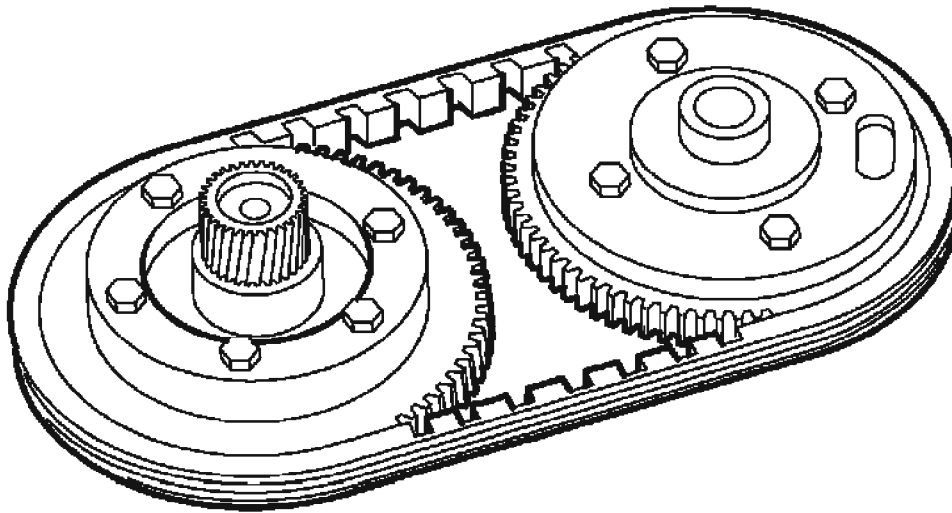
Removing No 10 Driven Sprocket Thrust Washer From Reverse/Overdrive Ring Gear Assembly
